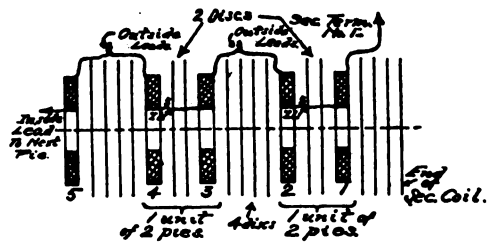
METHOD OF ASSEMBLING SECONDARY SECTIONS OR "PIES"
